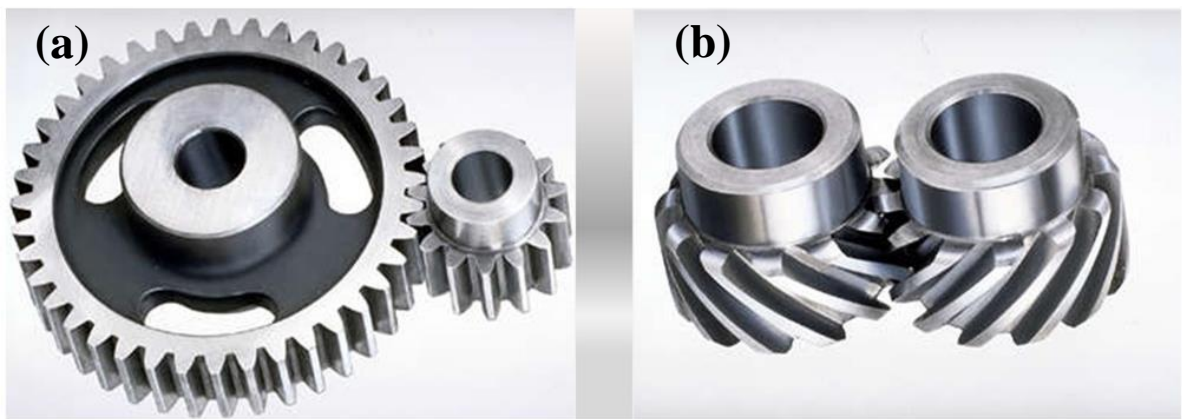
Gears types: (a) Spur gear and (b) Helical gear [62]
